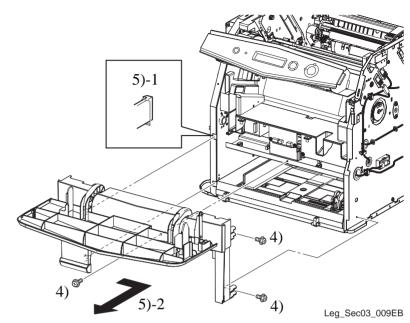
Removal of COVER FRONT L and COVER FRONT ASSY U (1)
